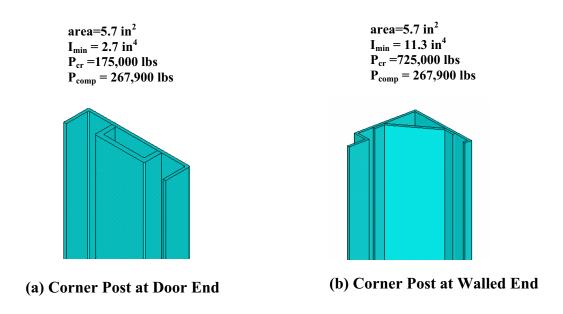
Corner Post Cross Sections -- Properties and Load Capacities without Wall/Door Participation
